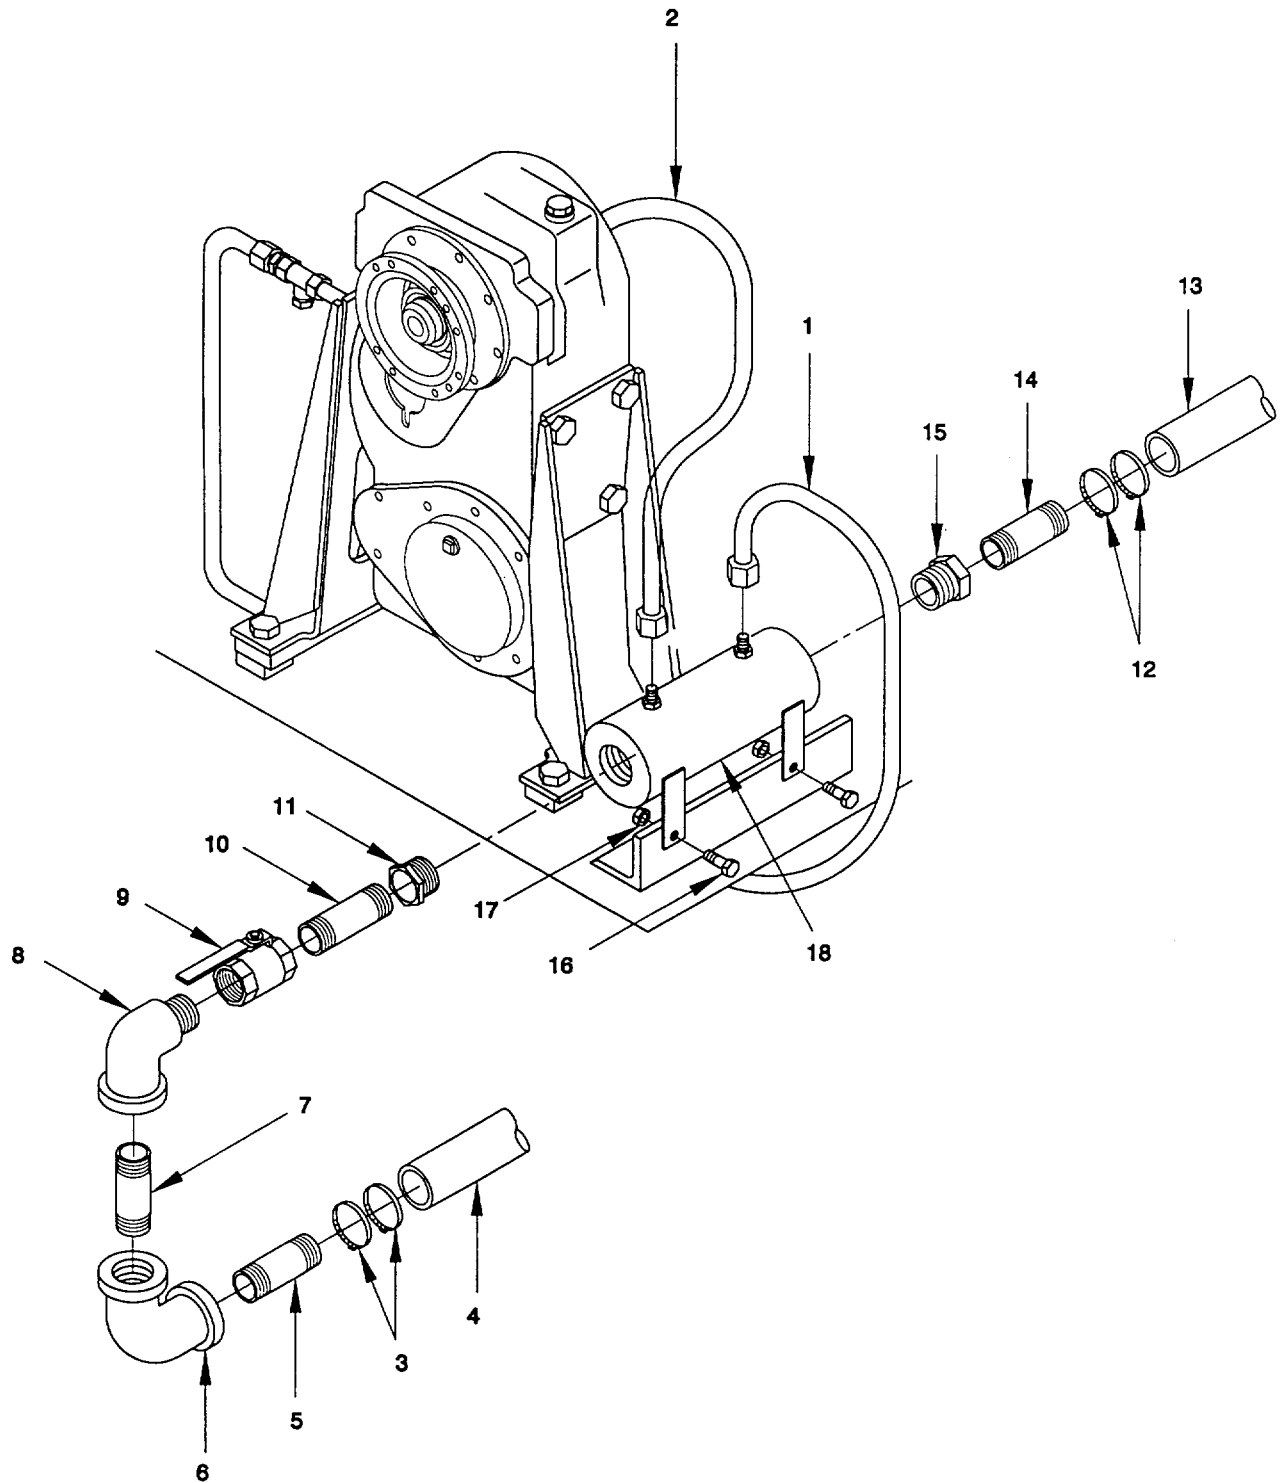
Oil Cooler, Drive Train, Remove/Install.
